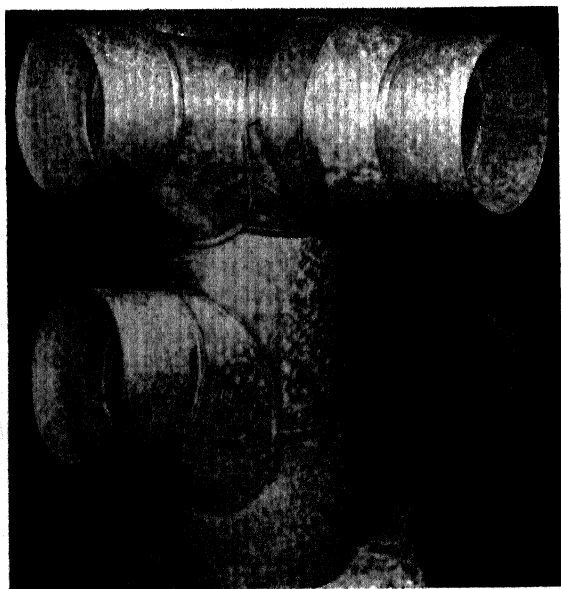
Special offset elbows for air ducts built from galvanized iron, welded by carbon arc with tinned copper alloy feeder rod.
